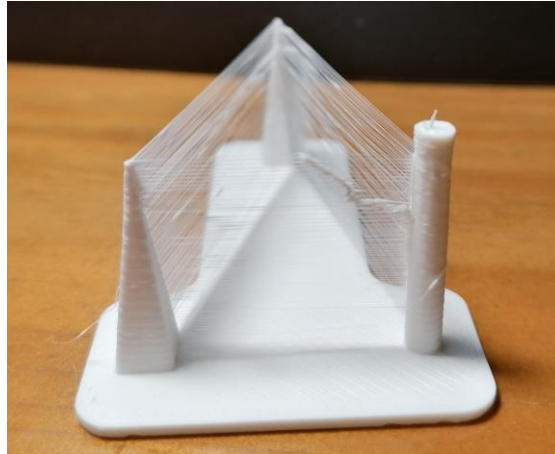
Piece printed in PLA with the filament without being dehumidified.
